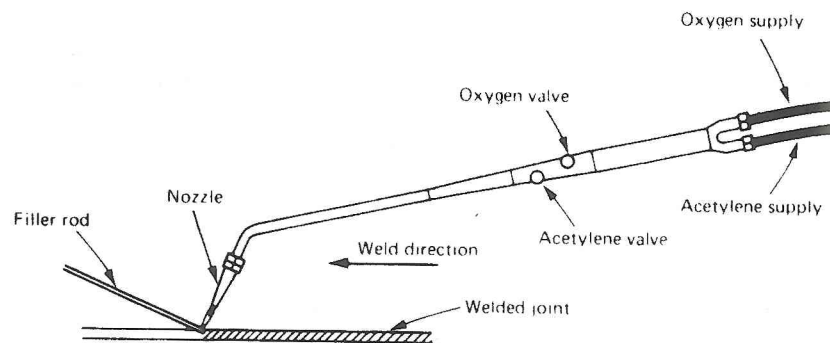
Gas welding with an oxy-acetylene torch
